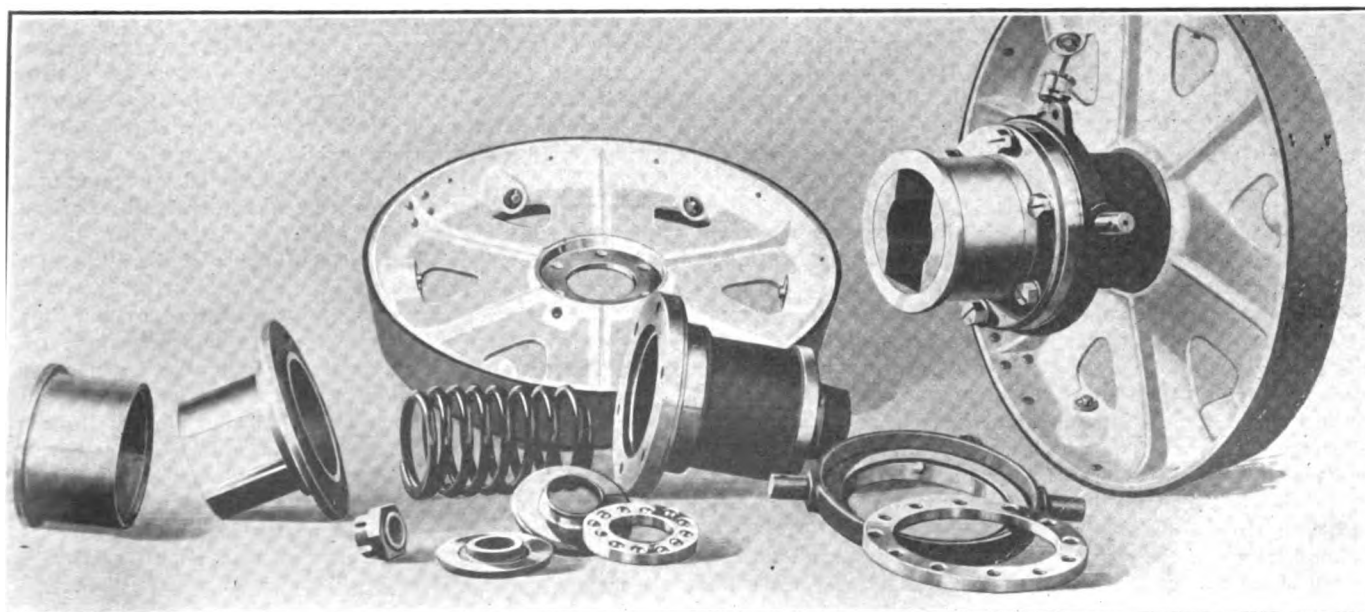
Disassembled view of the cone clutch. New on the Rambler car for the 1913 season
